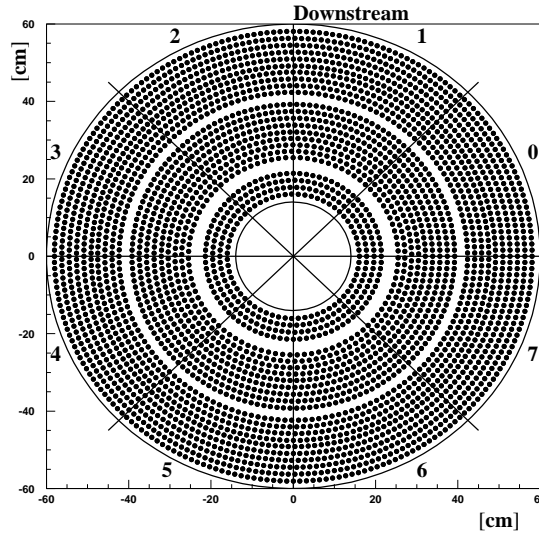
The position of the 3349 holes that need to be drilled in the downstream end plate of the CDC. The gaps in radius after layers 4 and 13 are due to the layers just beyond these being stereo wires.
